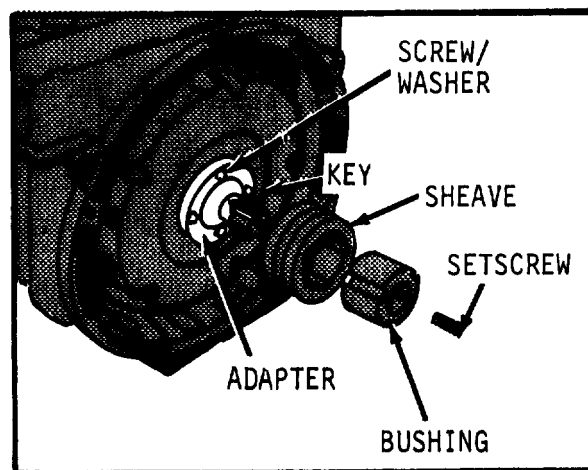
Engine belt drive sheave and adapter -exploded view.
